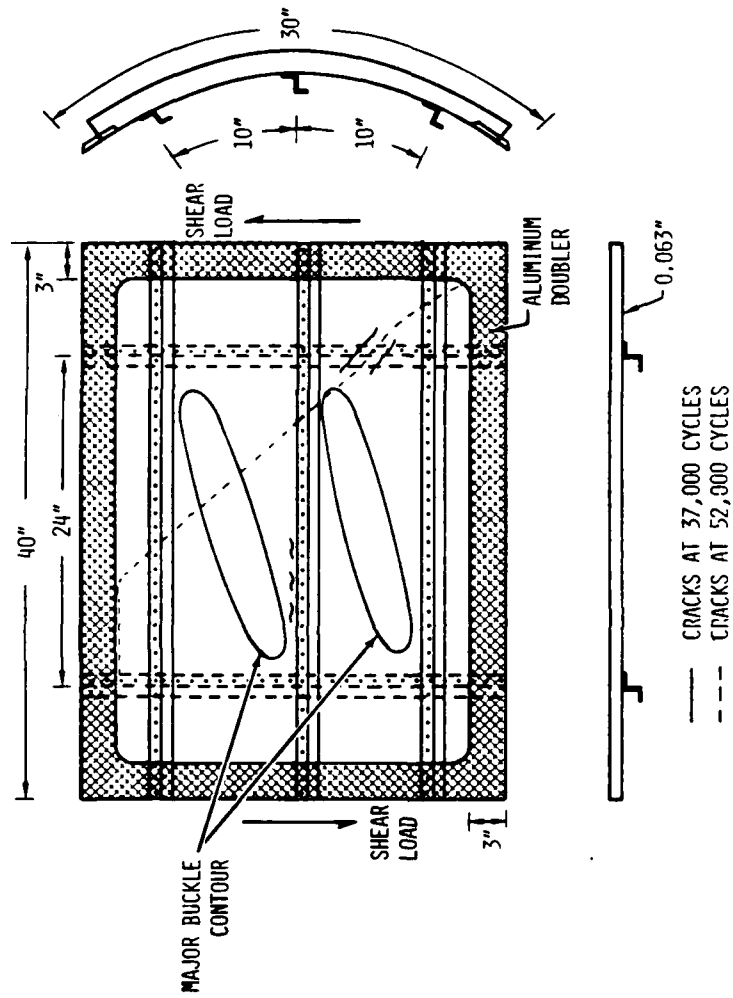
Fatigue Failure Mode of Aluminum Shear Panel
